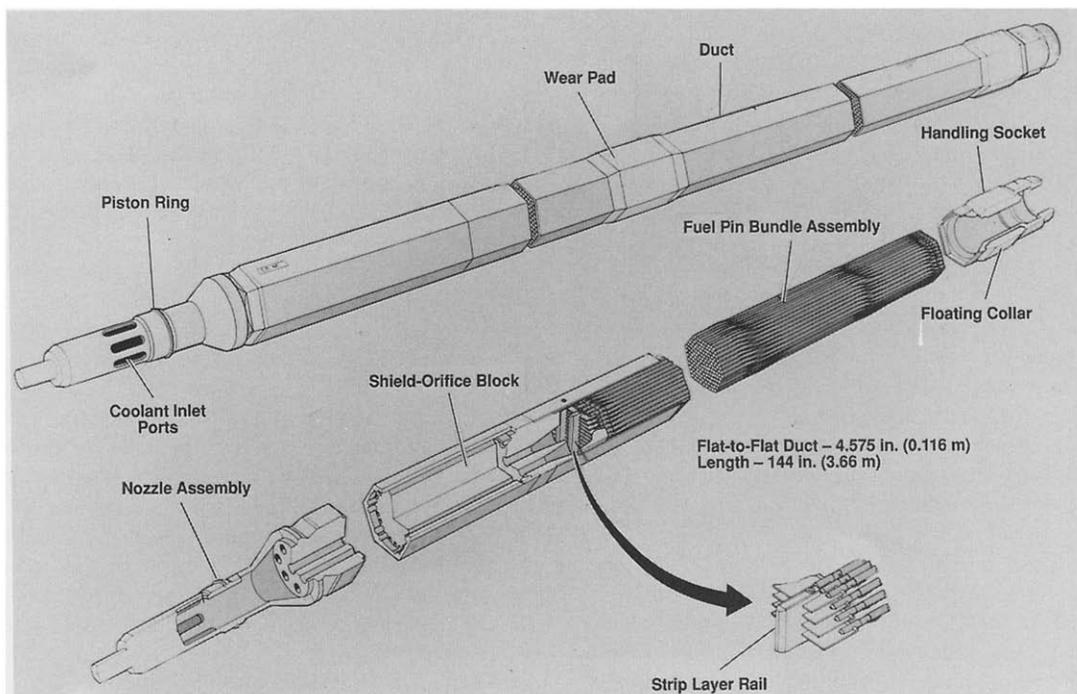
Schematic of Fast Flux Test Facility series I driver fuel assembly.
